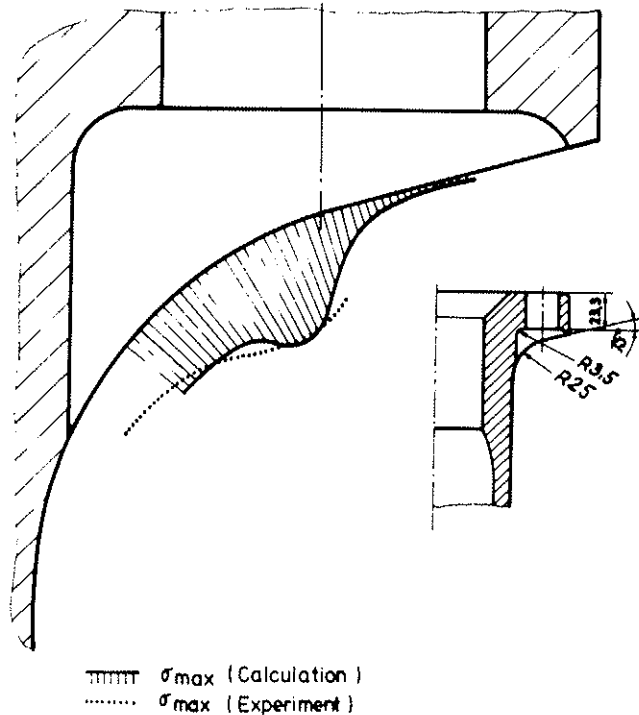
Stresses in the Web of the Rotor Shaft Flange
